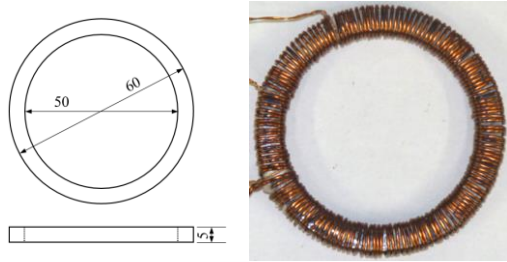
Dimensions and photograph of the ring core made of an electrical steel sheet. (Unit=mm)
